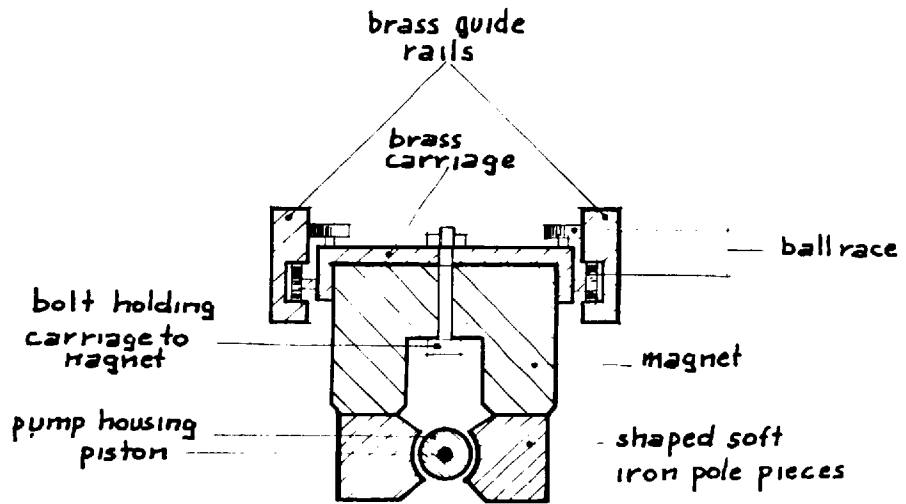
SECTION THROUGH PUMP HOUSING
